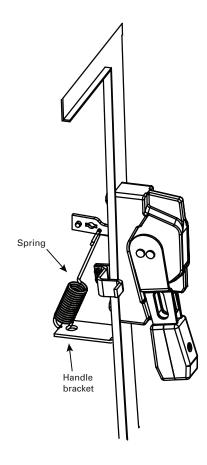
The spring attaches between the handle bracket and handle as shown. Install spring after adjusting threaded rod in Part 3, Step 5.
